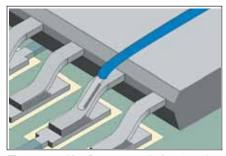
Not Recommended* Wire soldered to component lead, wire over component.
